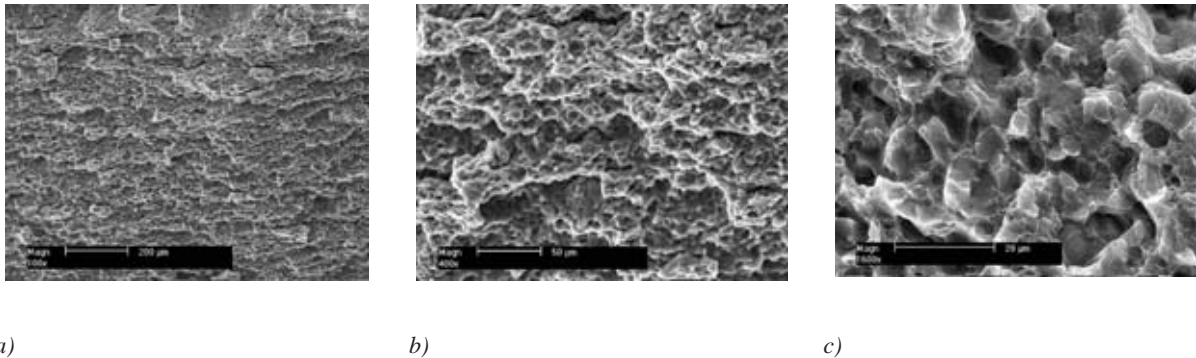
A view of a fracture after impact resistance test – specimen welded by FSW
